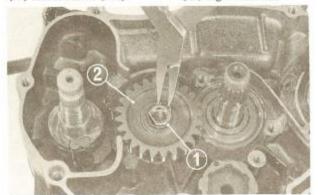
(1) Snap ring (2) Starter idle gear
